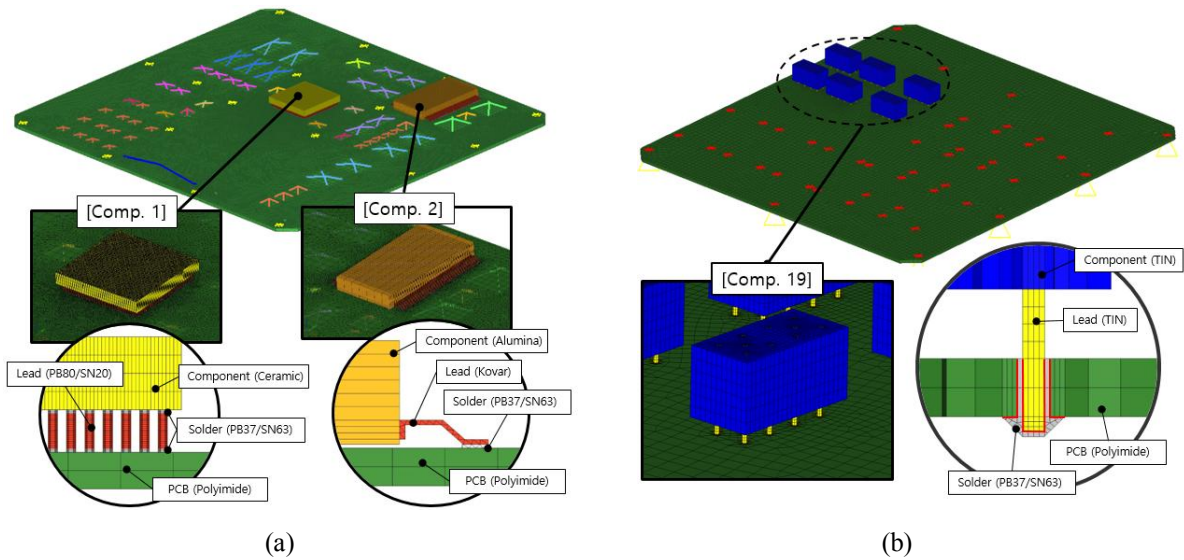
Detailed FEM for Component ((a) CM PCB, (b) RM PCB)
